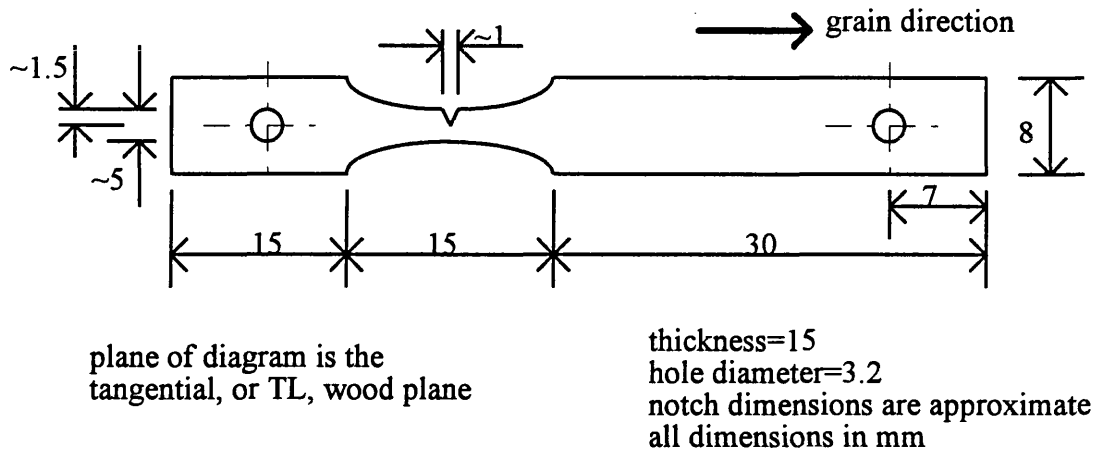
Sample dimensions for tensile tests in the in-situ loading jig.
